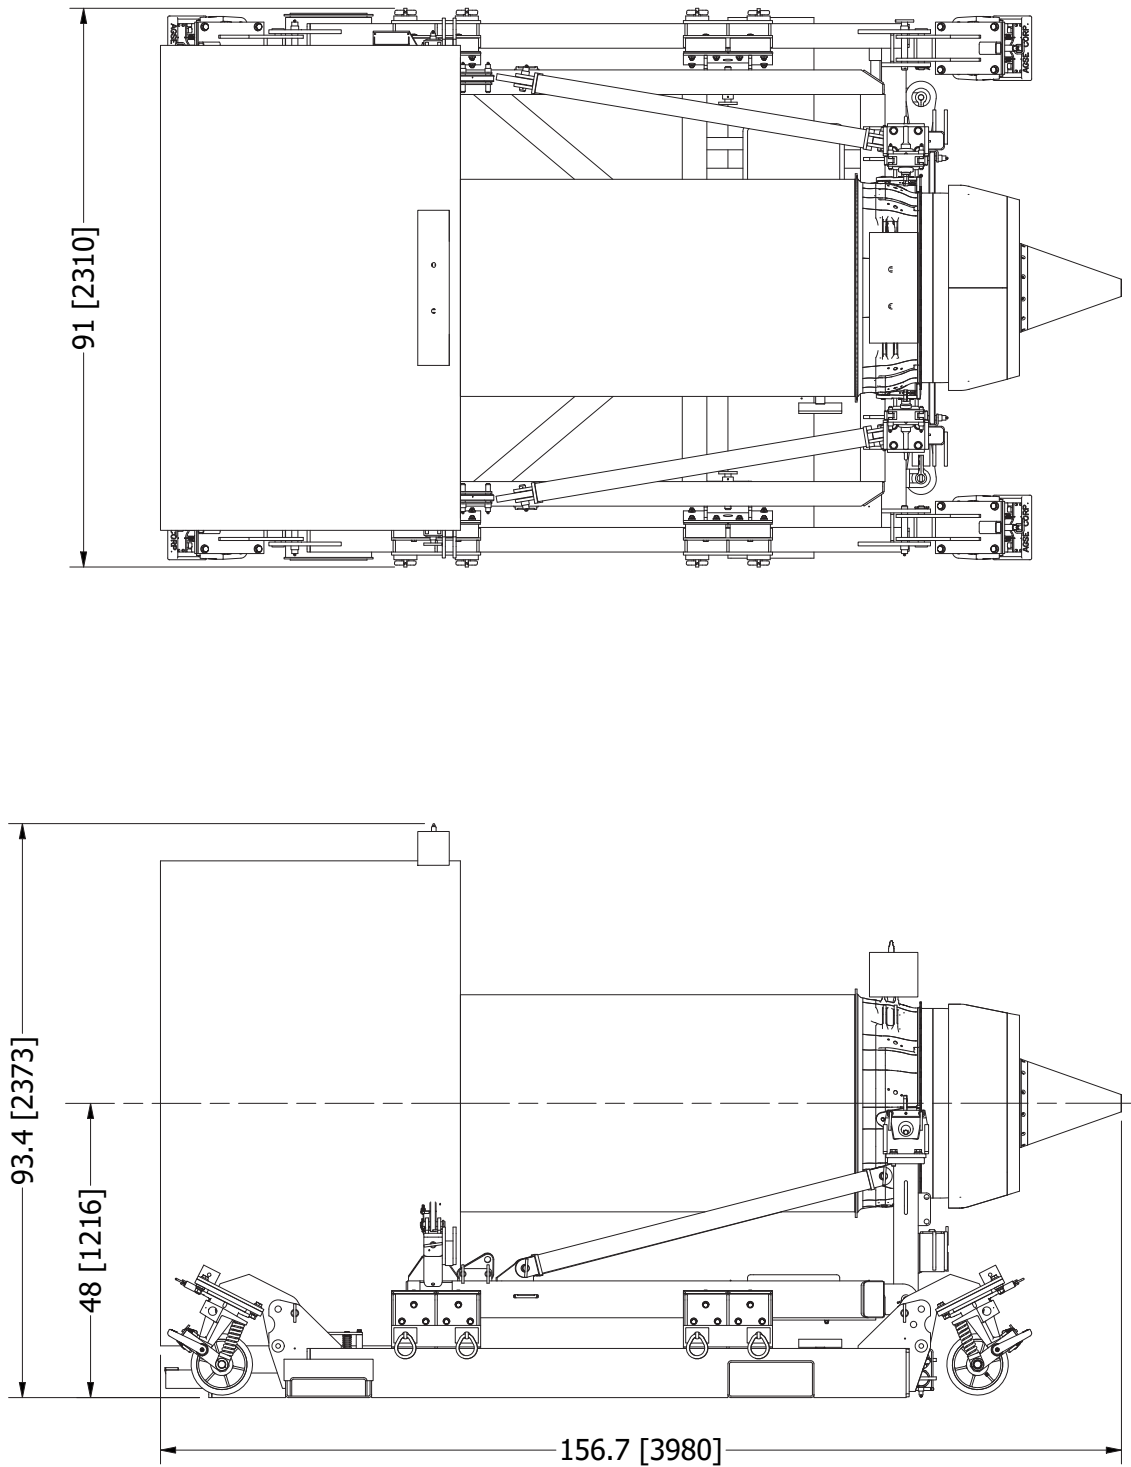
Dimensions of AGSE-E240-G01 with QEC Engine Minus Inlet in Stow Position
